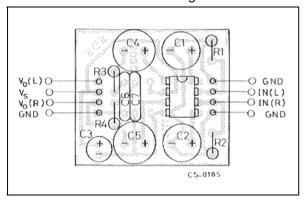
P.C. Board and Components Layout of the Circuit of Figure 2
